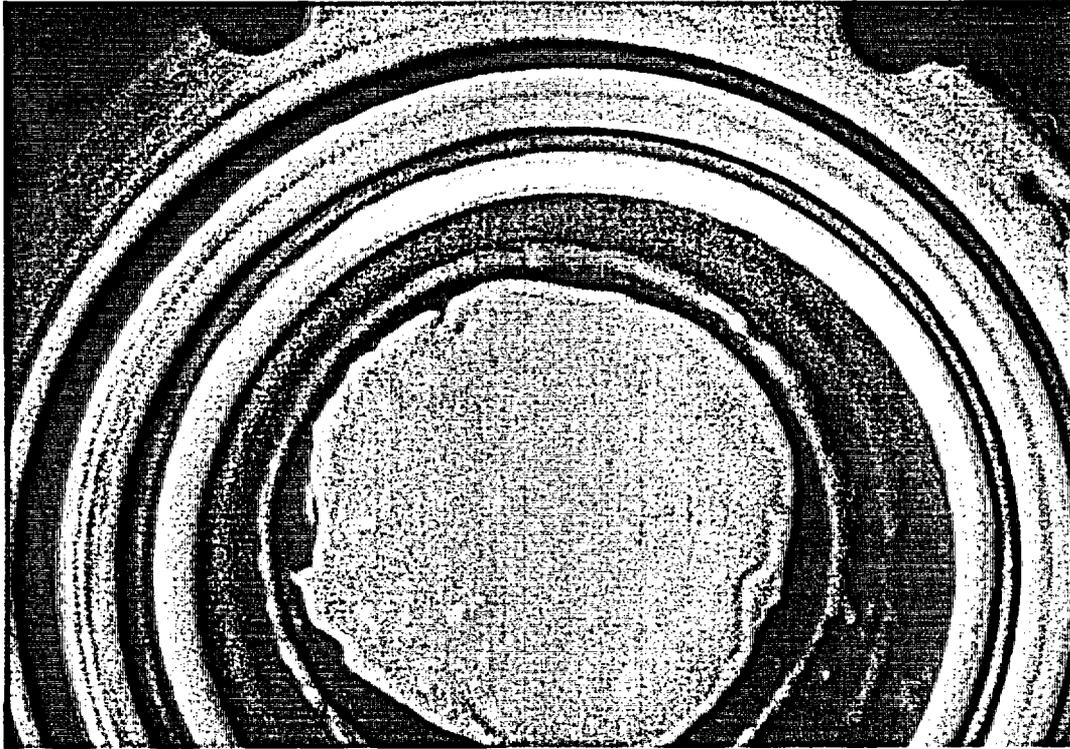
VPC Internal Glazing Compound Layer shows no sign of Valve contact
